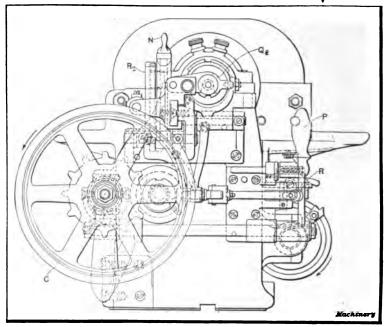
End Elevation of the No. 00 Machine showing Collet Operating Mechanism
